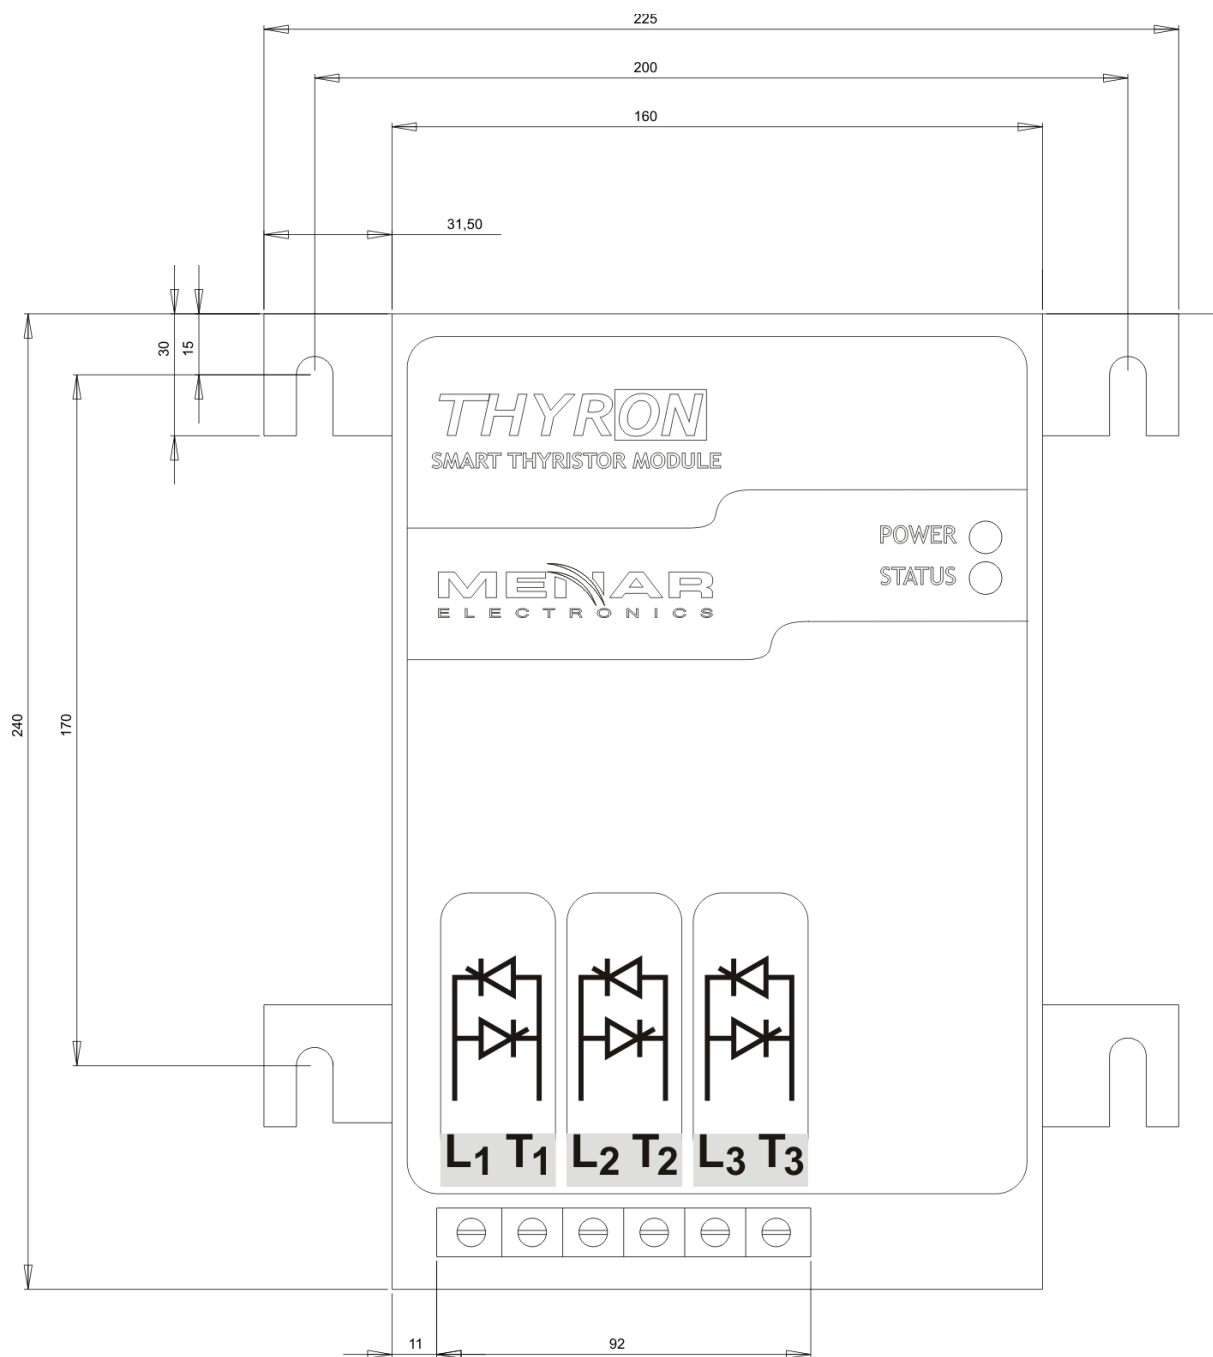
Mechanical drawing for Thyron® 3P3-50
